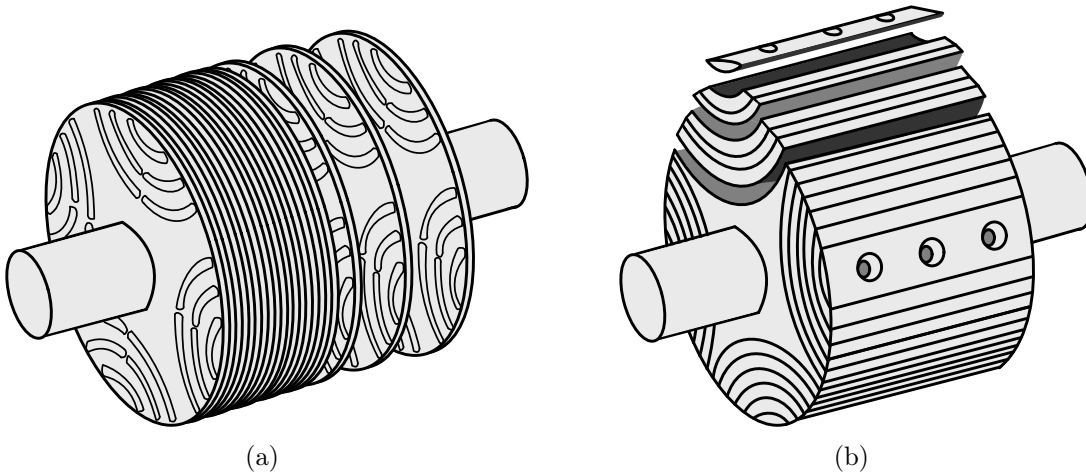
Rotor assembly techniques for RSMs: (a) TLA assembly [corresponding to the TLA RSM rotor shown in Fig. 2.2(d)]; (b) ALA assembly [corresponding to the ALA RSM rotor shown in Fig. 2.2(e)] (based on [110]).
